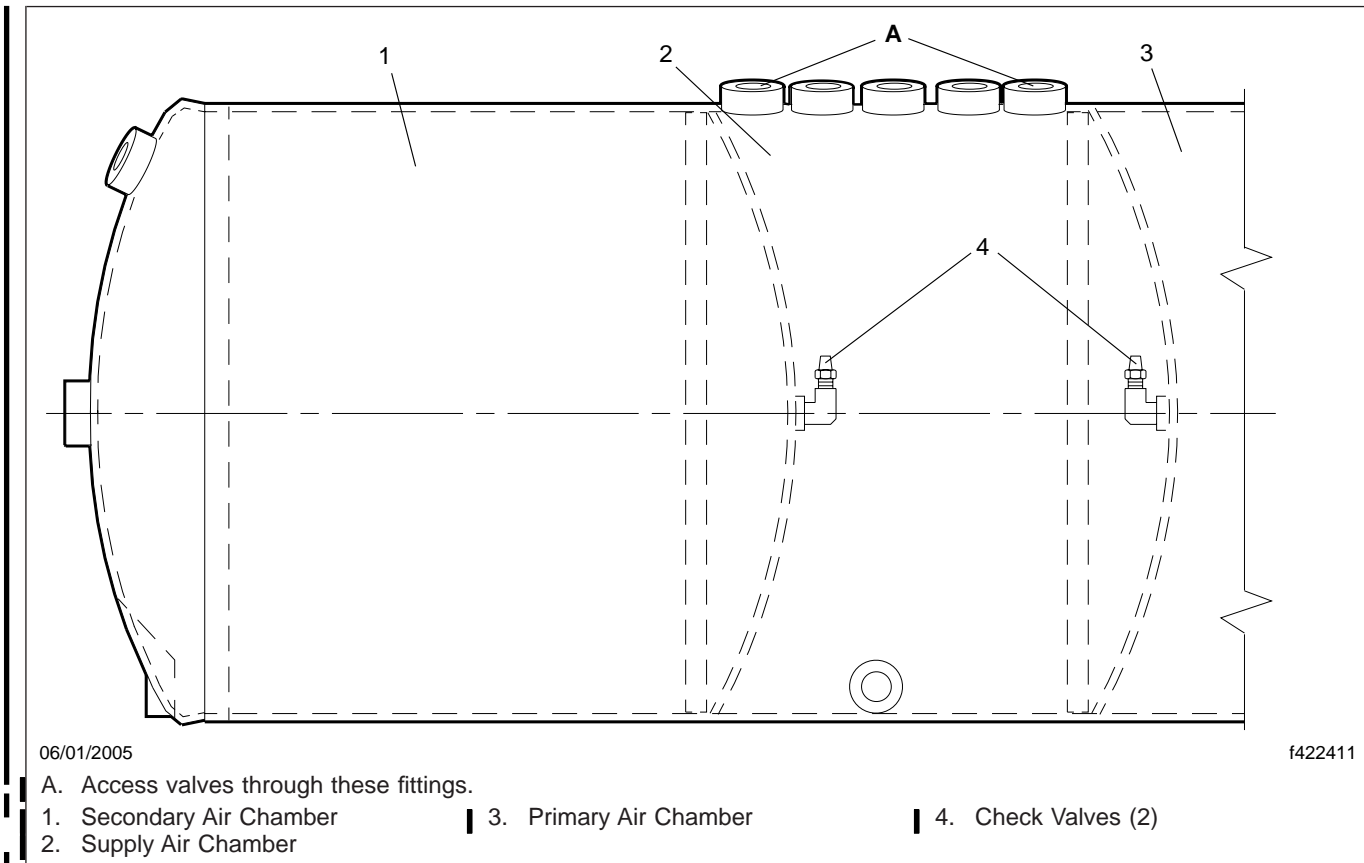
, Internal Check Valves, Three-Chamber Air Reservoir
